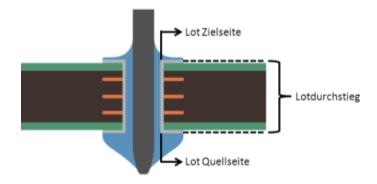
Schematic representation of a THT solder joint in cross-section. Ideal soldering with 100% solder penetration.
